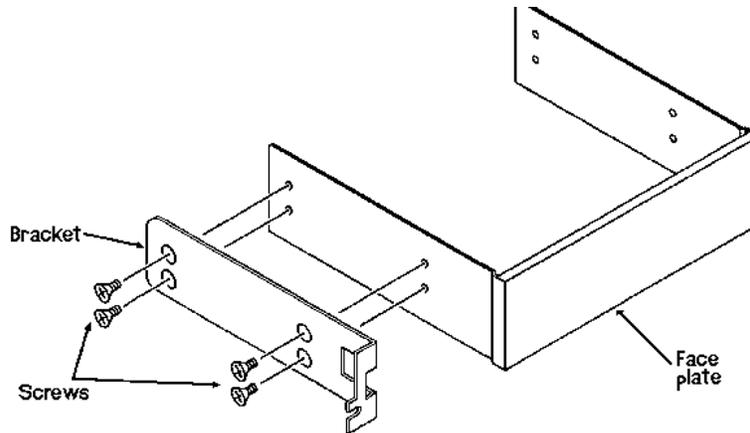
REMOVE MOUNTING RAIL FROM FACE PLATE
